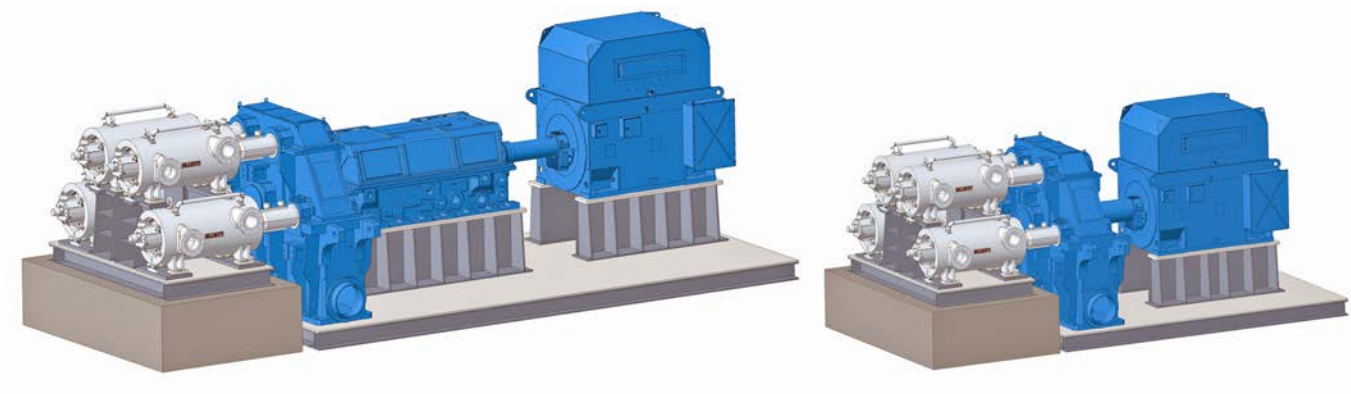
Flex-Op compressor arrangement with four individual centrifugal compressors mounted to a single, multi-pinion gearbox.
